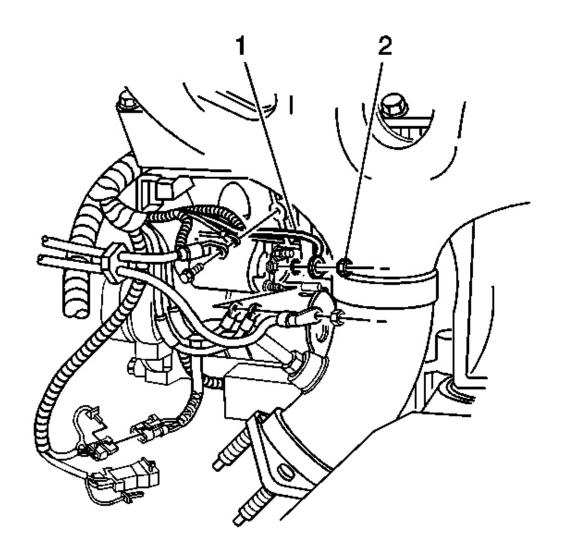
Solenoid Engine Harness Leads & Positive Battery Cable Terminal Courtesy of GENERAL MOTORS CORP.
